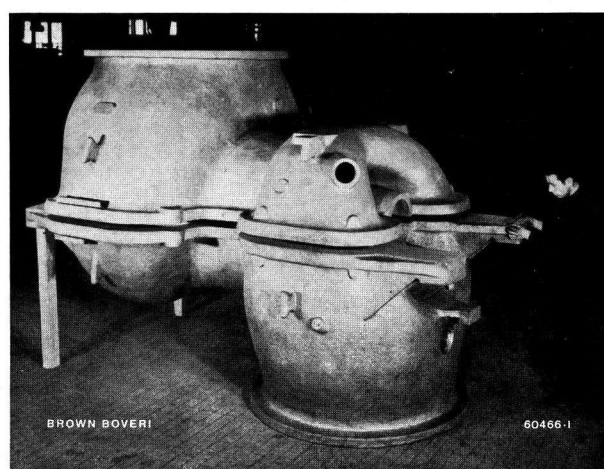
Castings for a 10,000 kW combustion turbine.
